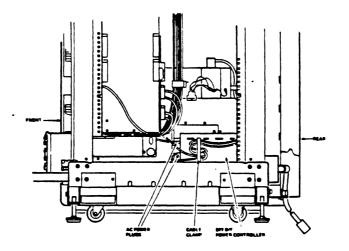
POWER CONTROLLER REMOVAL - SIDE VIEW
